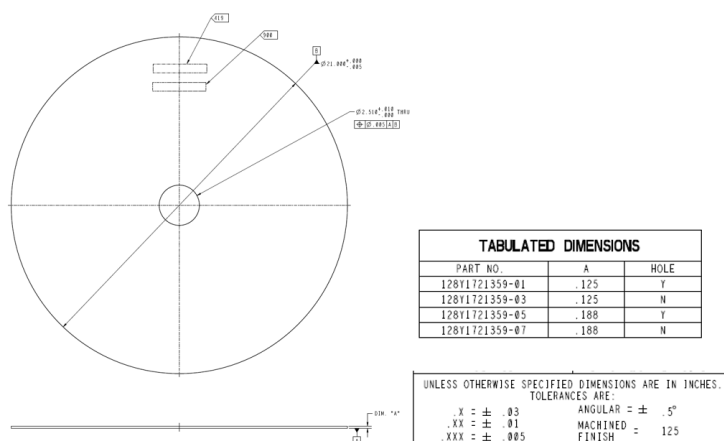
Engineering Drawing (128Y-1721359-D1) of the Cu Interstitial Plates (Dimensions in Inches).
